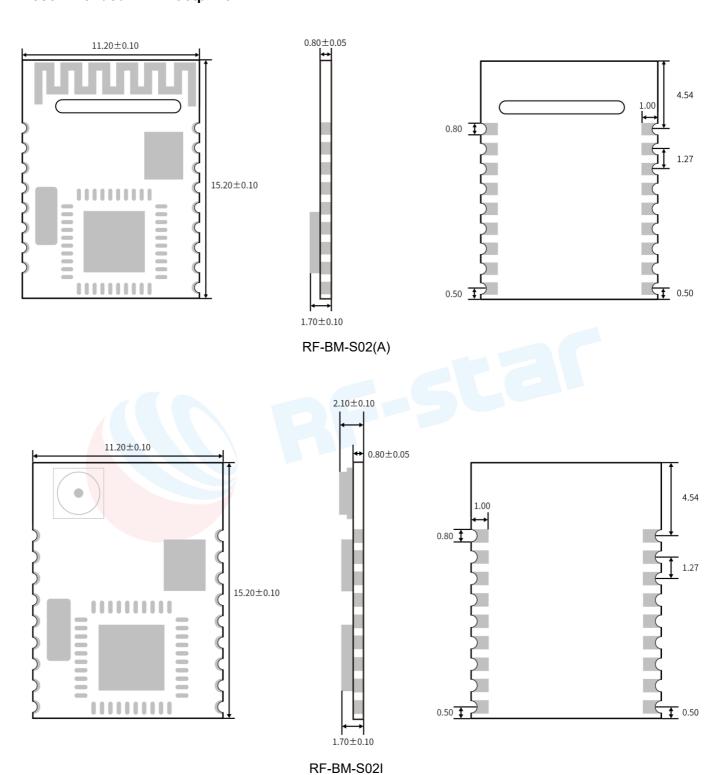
Recommended PCB Footprint of RF-BM-S02 (mm)
